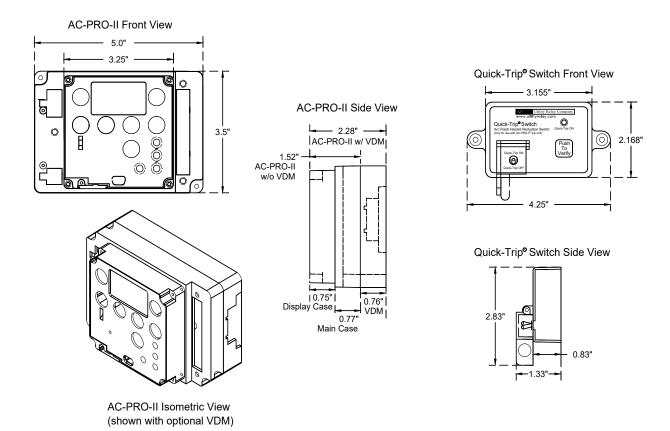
AC-PRO-II & Quick Trip Switch Drawings and Dimensions
